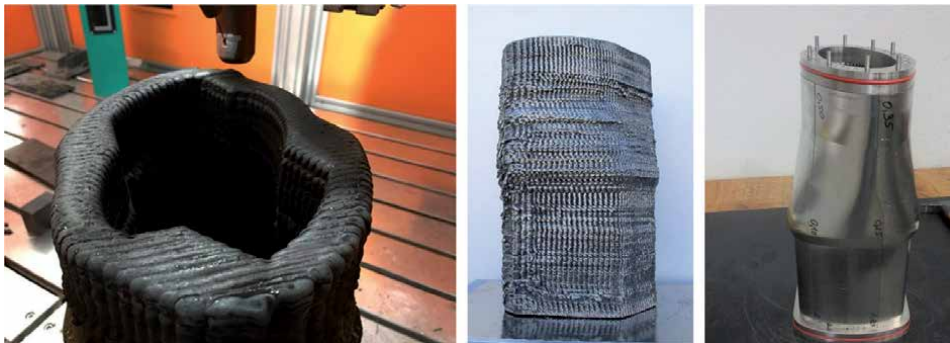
Nickel alloy Invar 36 CFC tooling PMD manufactured. From left to right, PMD manufacturing, tooling as-deposited, and tooling as-milled.
